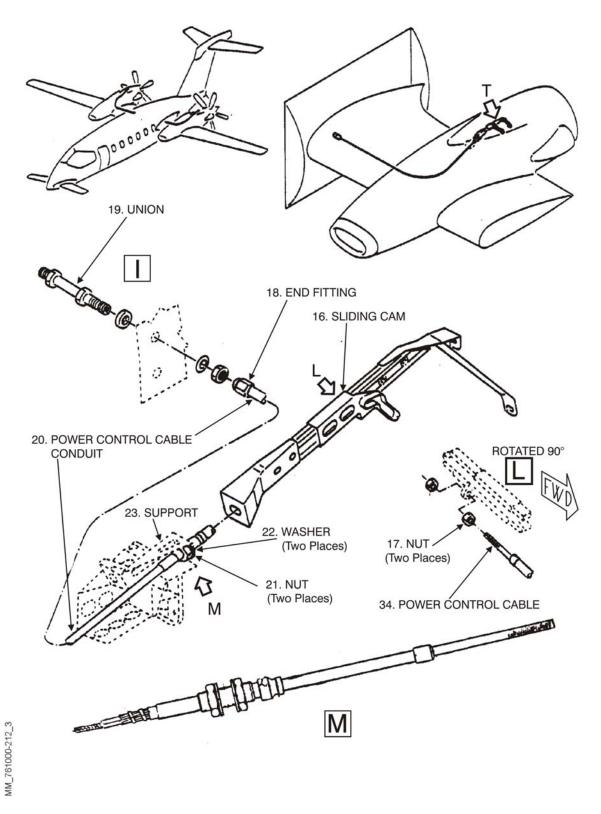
Power/Propeller Control Cables (Fuselage-Engine) - Removal/Installation (Sheet 2 of 4)
